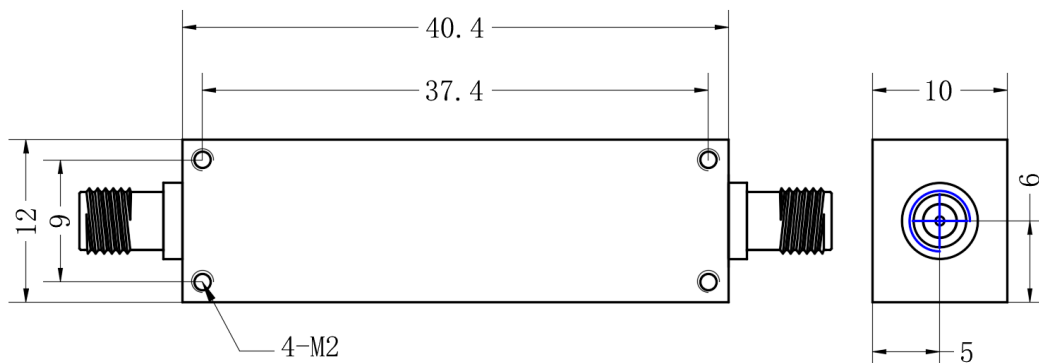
JX-LCF1-155M245M-S20 front panel layout
